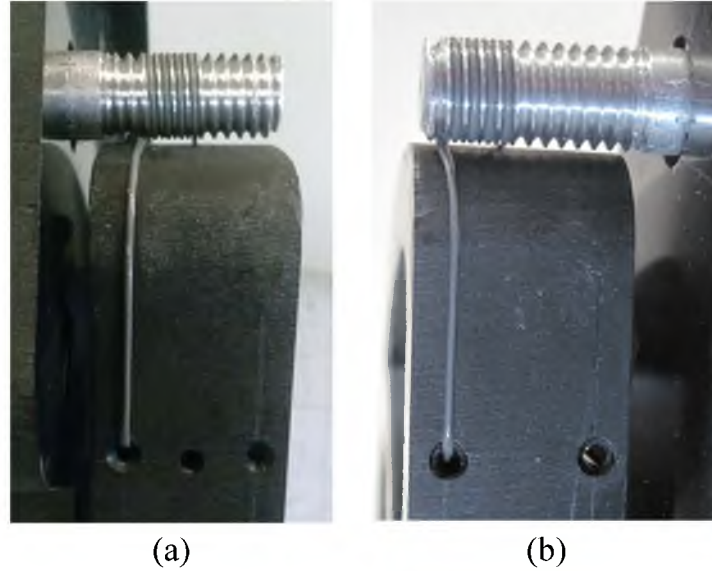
The alignment of the anchoring holes and the thread of the threaded capstan, for both the (a) flexed and (b) extended extremes of the sector pulley, ensures that the wire does not skip threads.
